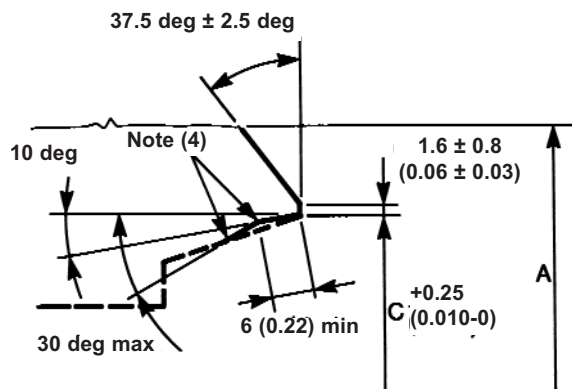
Welding end detail for joint without backing ring for use on 22 mm (0.88 in.) and thinner nominal wall thickness.
